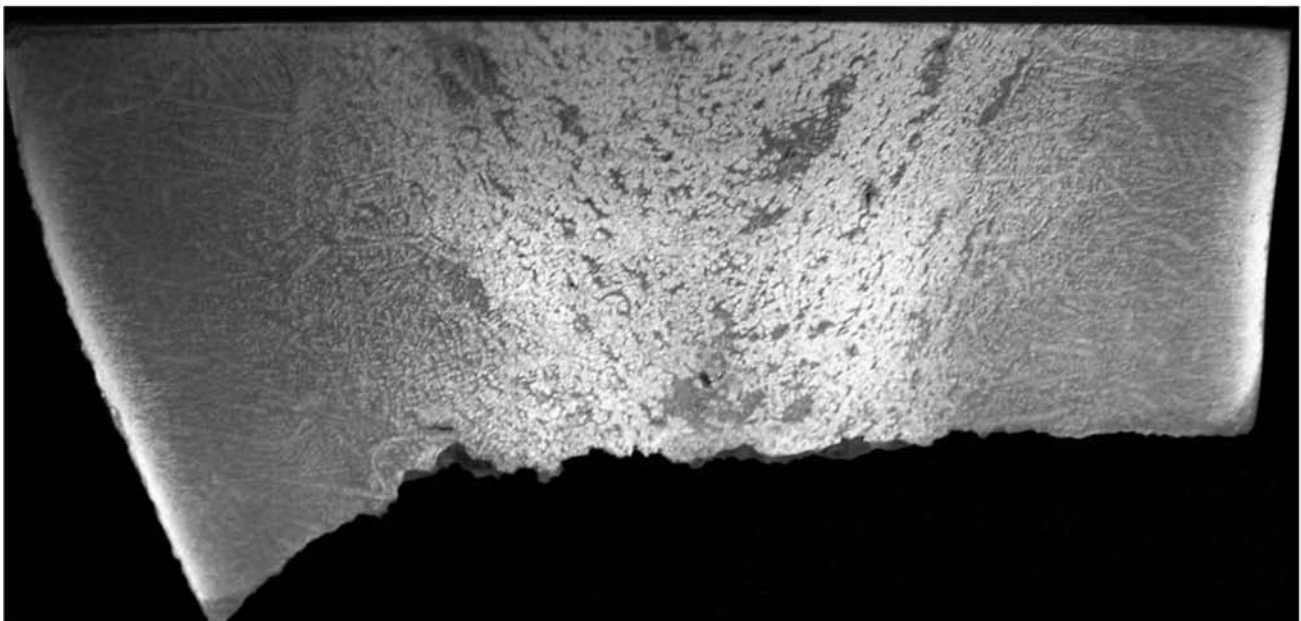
Macrograph of a plane transverse to a fracture in a steel casting. (The fracture surface is at the bottom of the image.) The central region of the casting presents strong “V” segregation and some porosity. Etchant: hot hydrochloric acid
